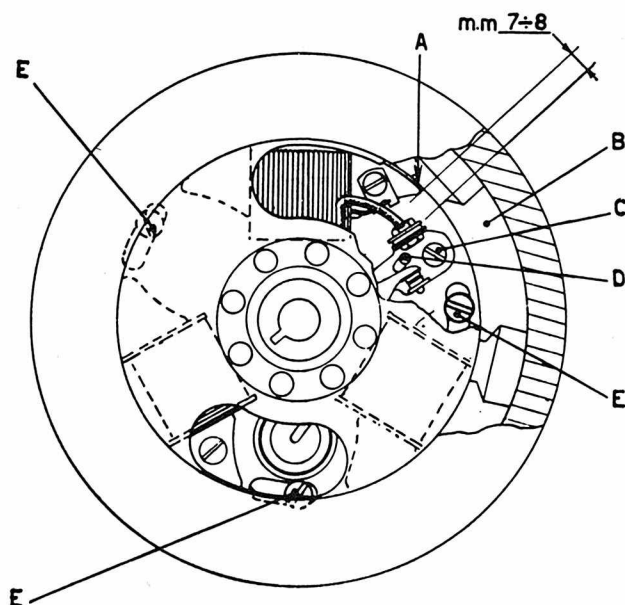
Inspection port in flywheel (rotor) permits access to screw (C) to adjust breaker contacts and time the ignition.
